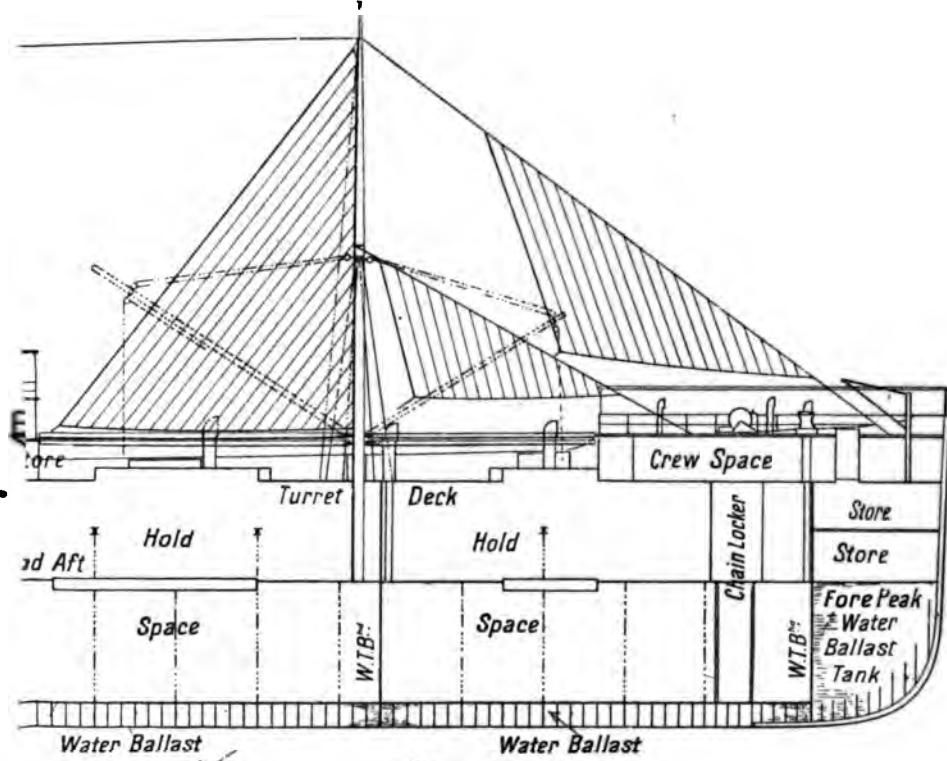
Hold View of Turret Steamer. Ordinary method of construction with beams.
